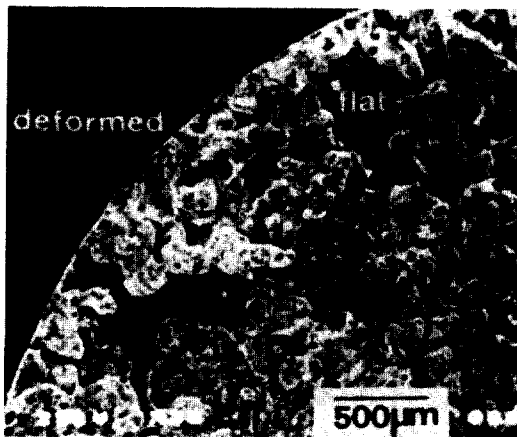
Typical form of flat and deformed area on the fractured surface of tensile tested specimen
